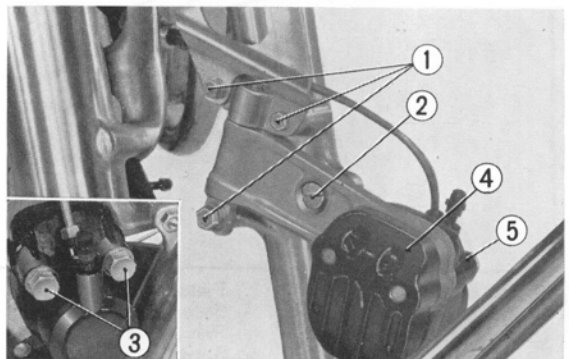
① Caliper mounting bolts ② Caliper adjusting bolt ③ Caliper set bolts ④ Caliper B ⑤ Caliper A
